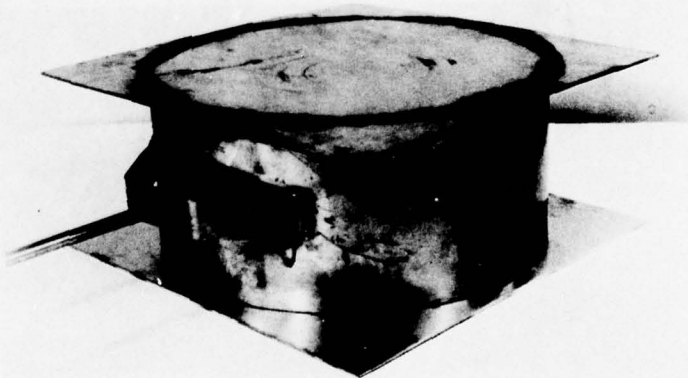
STAINLESS STEEL RETORT PRIOR TO FINAL WELD SEALING.
